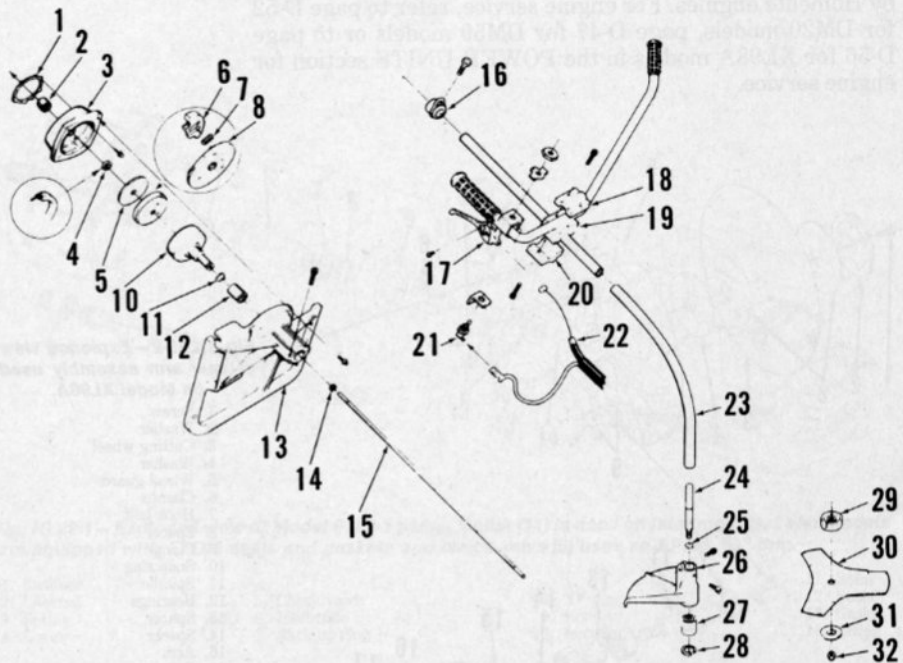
Exploded view of ST-400 brushcutter.
